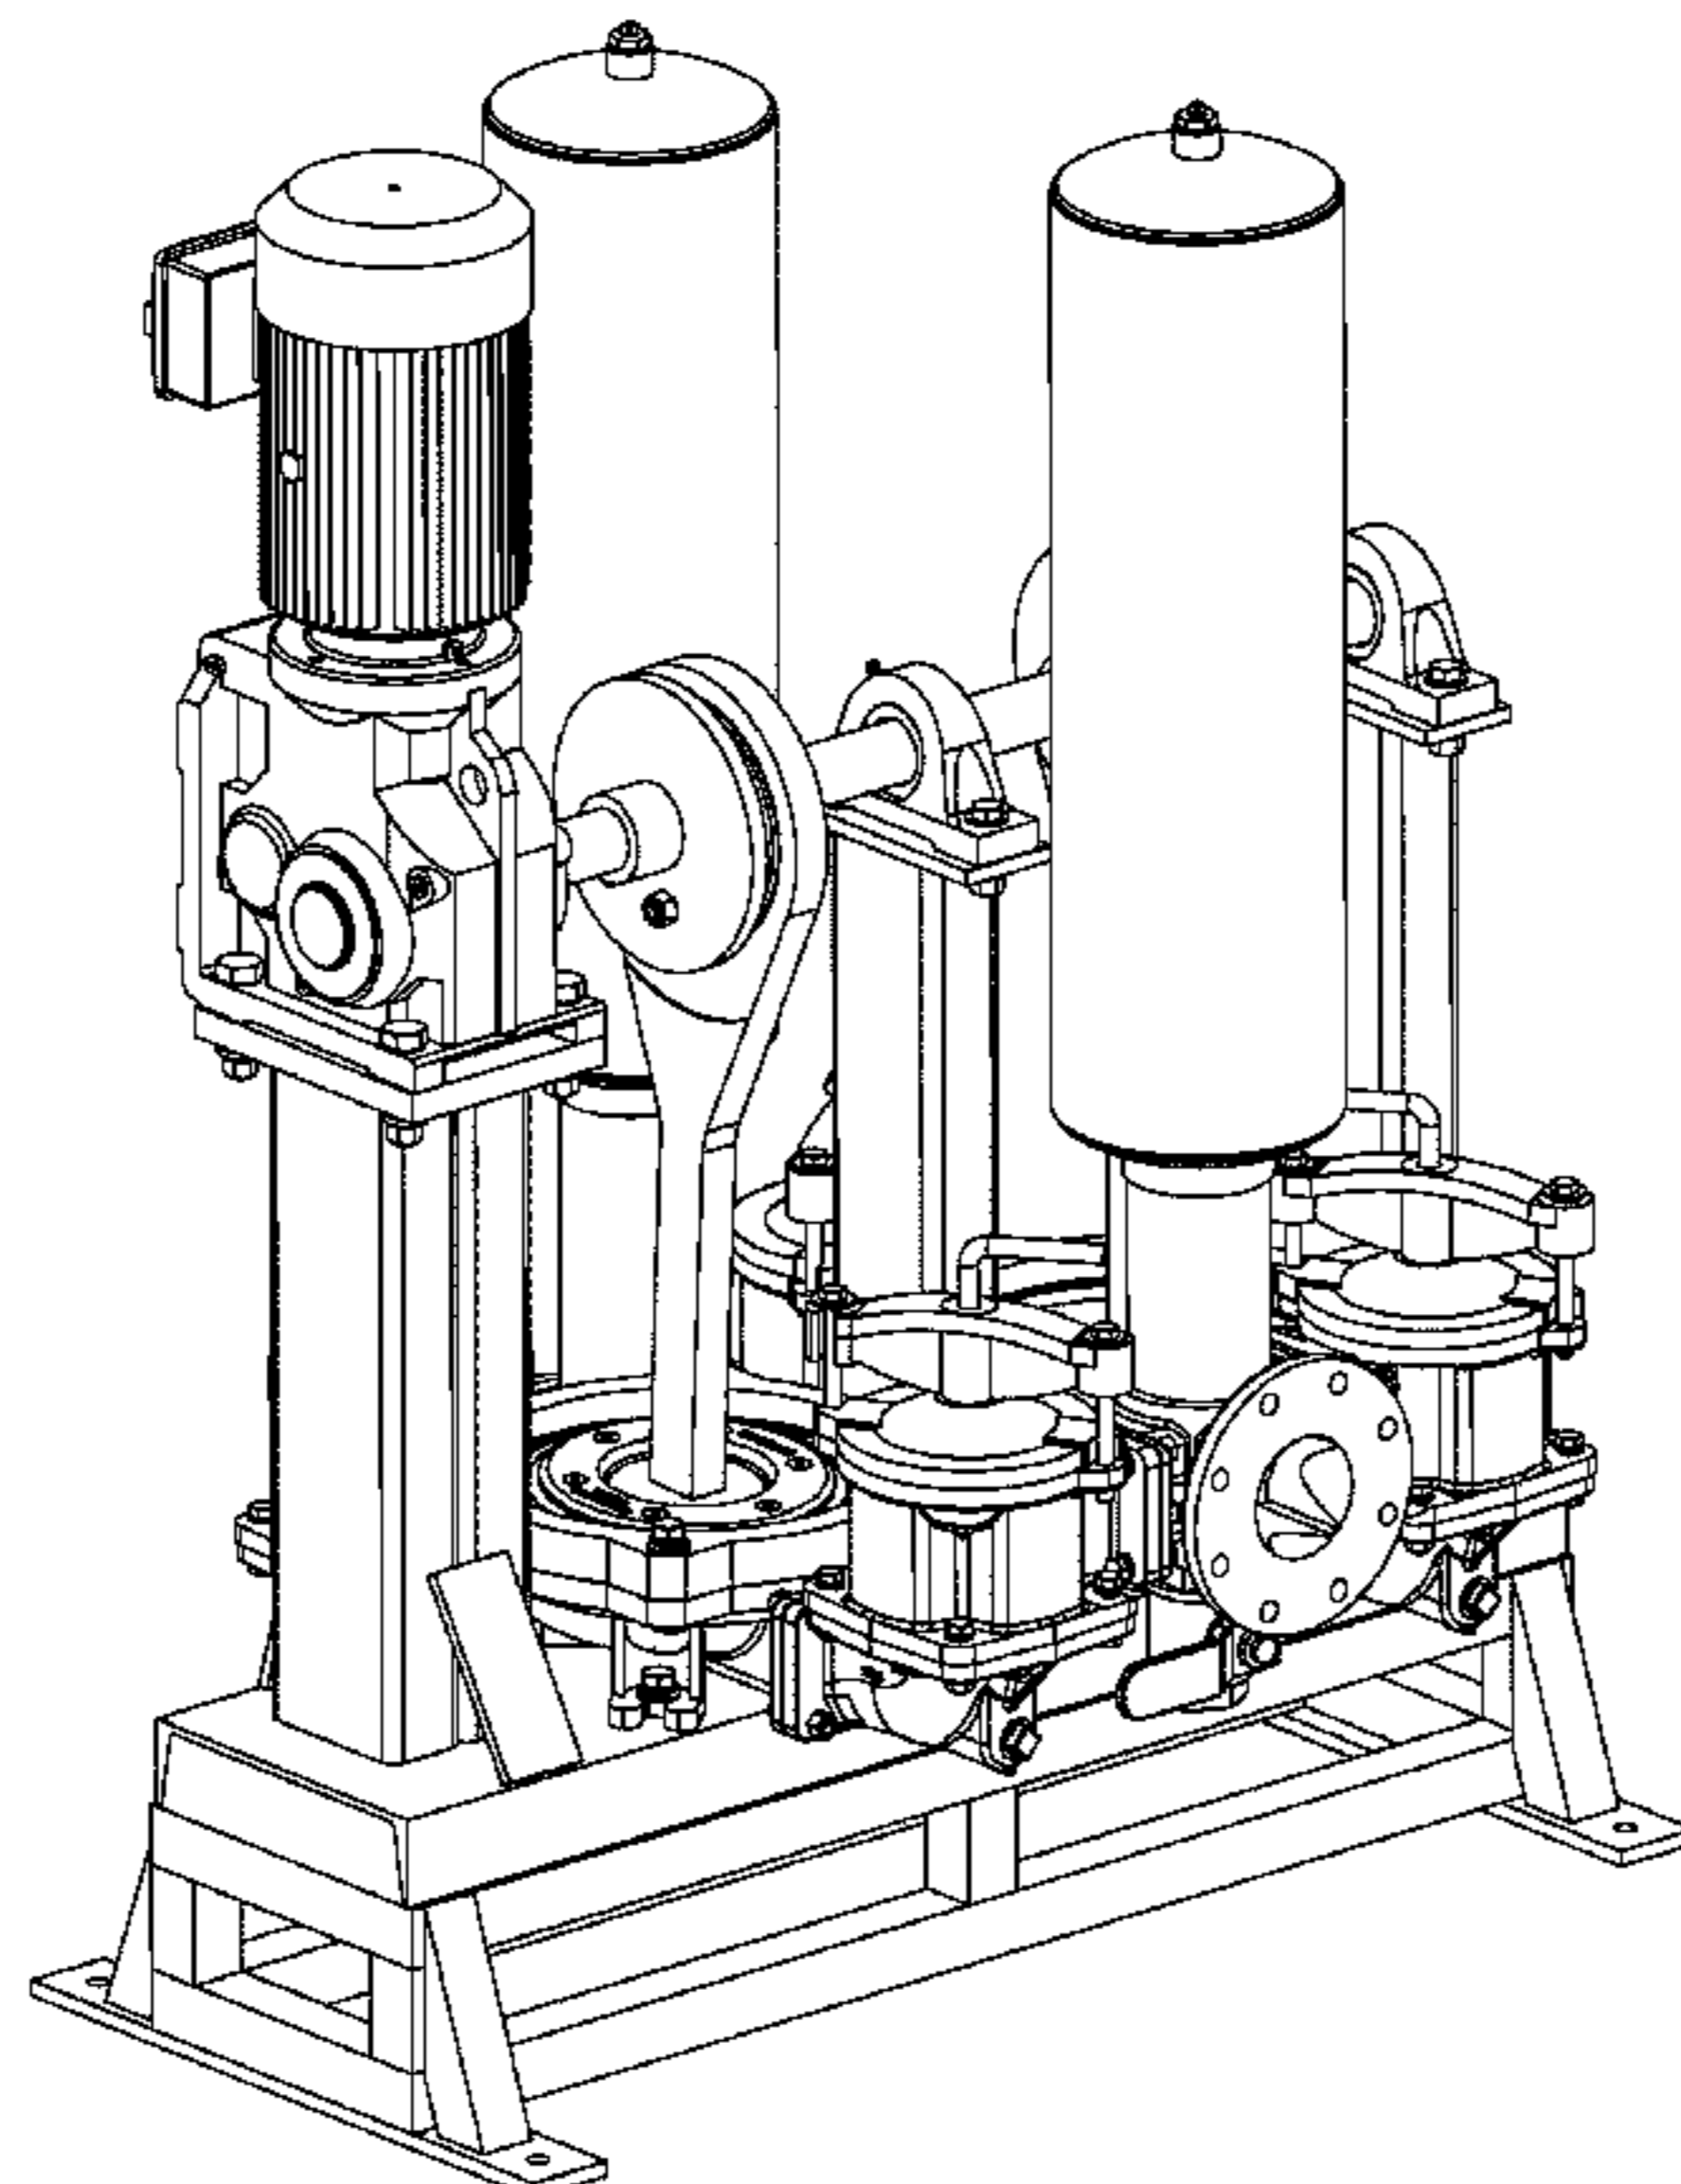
is a diagonal front perspective view seen from right side of a combined positive displacement double disc pump and motor thereof;
